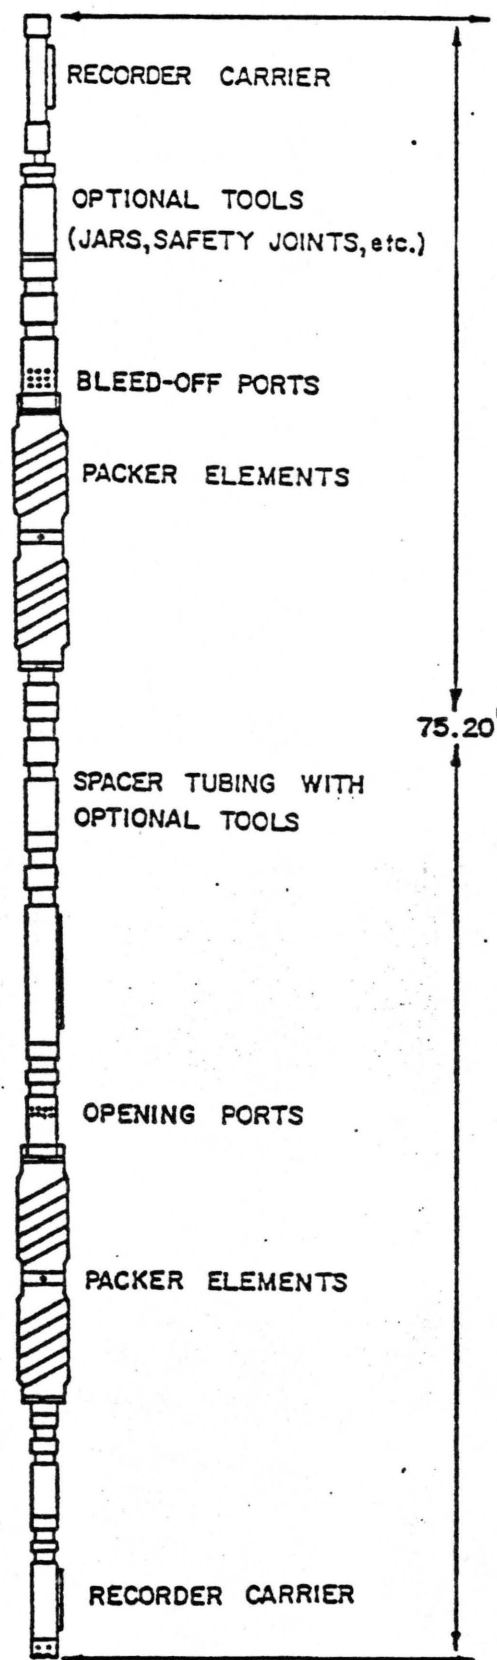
Inflatable straddle packer tool for conventional drill-stem tests. (Courtesy Lynes, Inc., Houston, Texas)
